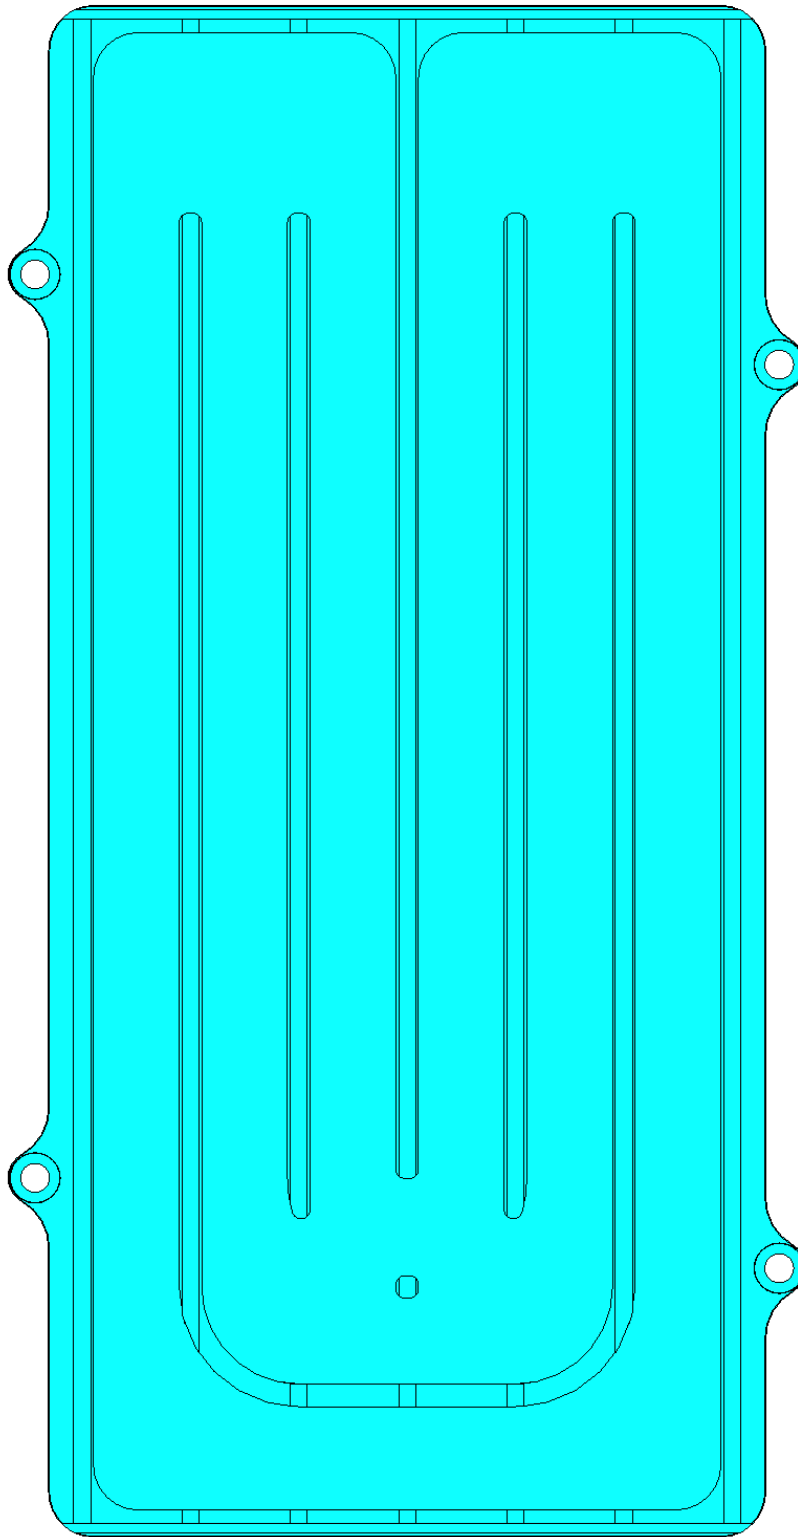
Top view of the cold plate base, showing the double U flow channels and center support ribs with dovetails.
